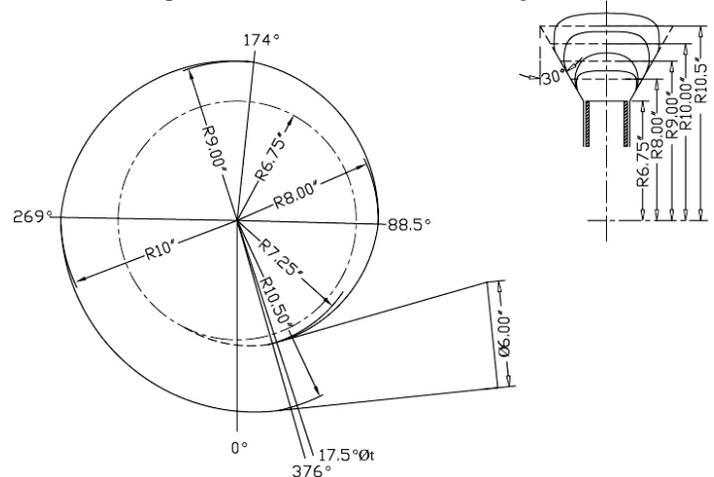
Drawing of Volute Casing: Elevation of Volute Casing and Section through of Volute Casing
